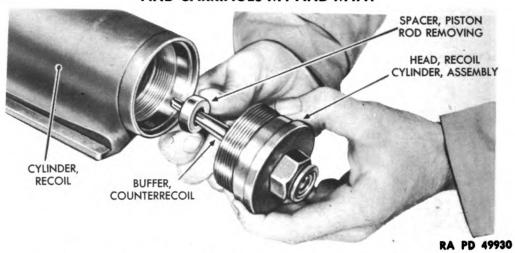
Inserting the Piston Rod Removing Spacer and Recoil Cylinder Head Assembly
